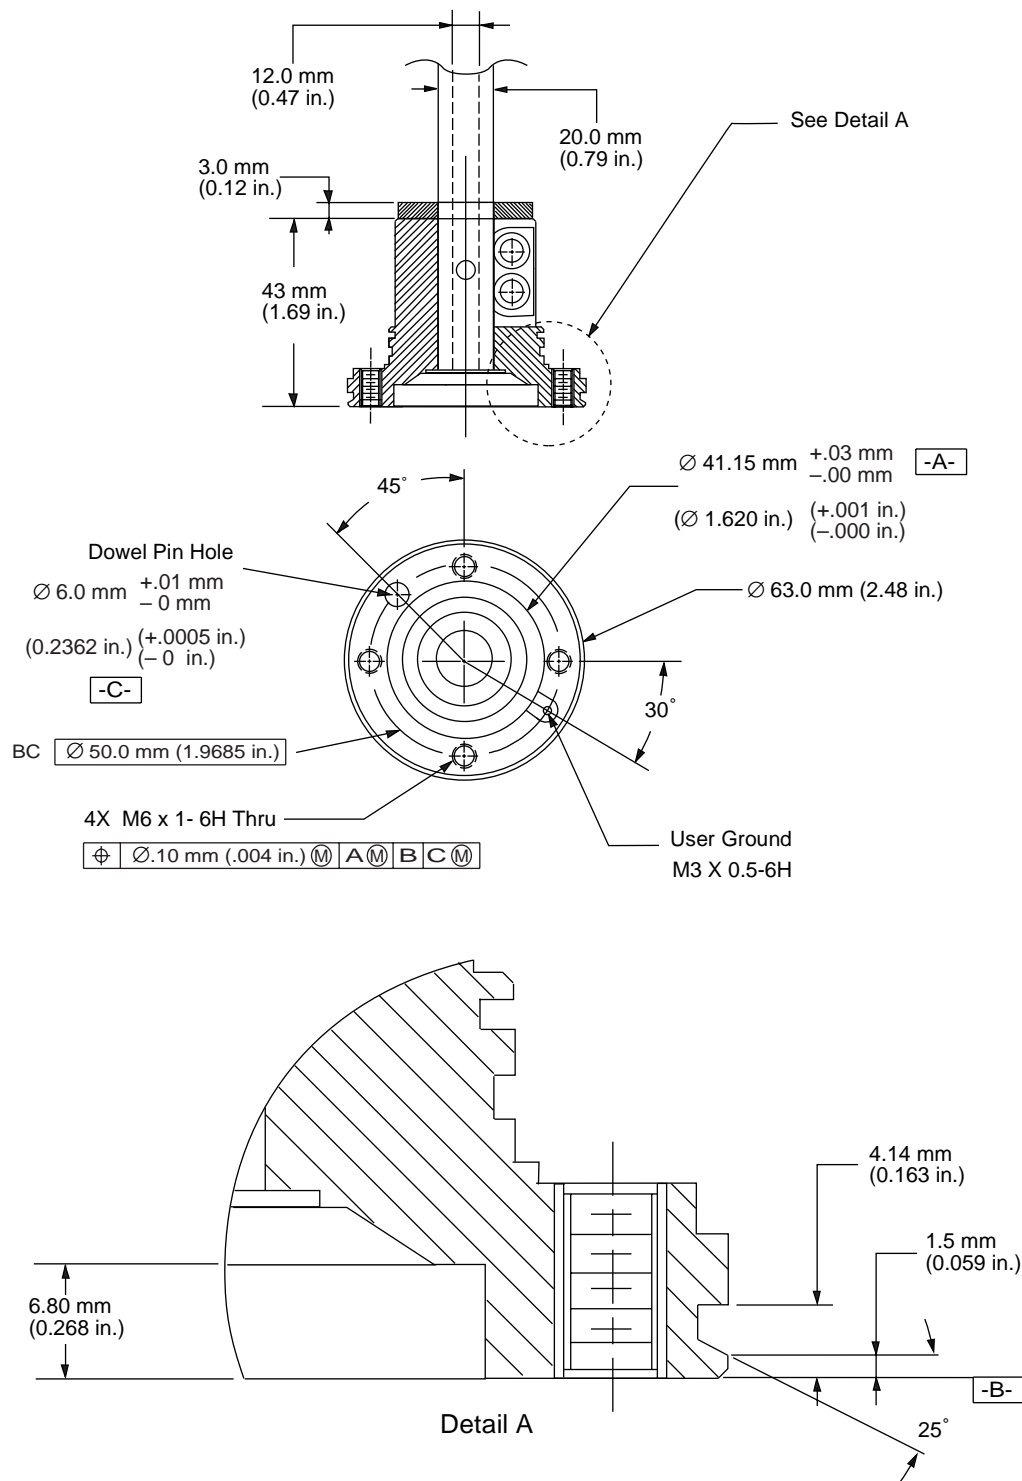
Tool Flange Dimensions for Adept Cobra Robots
